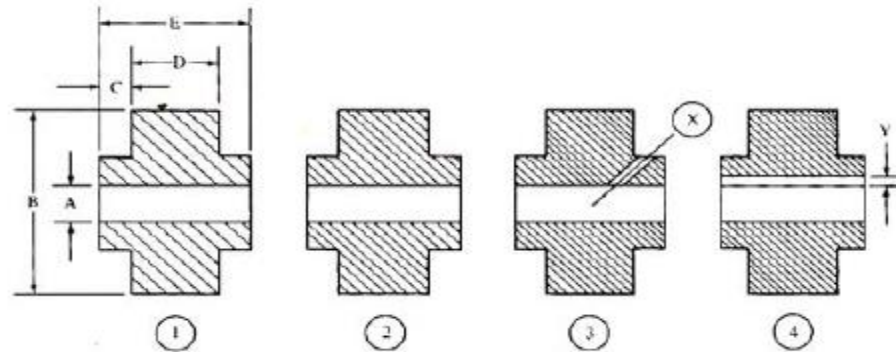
A family of parts with similar manufacturing process requirements but different design attributes. All parts are machined from cylindrical stock by turning; some parts require drilling and/or milling.
